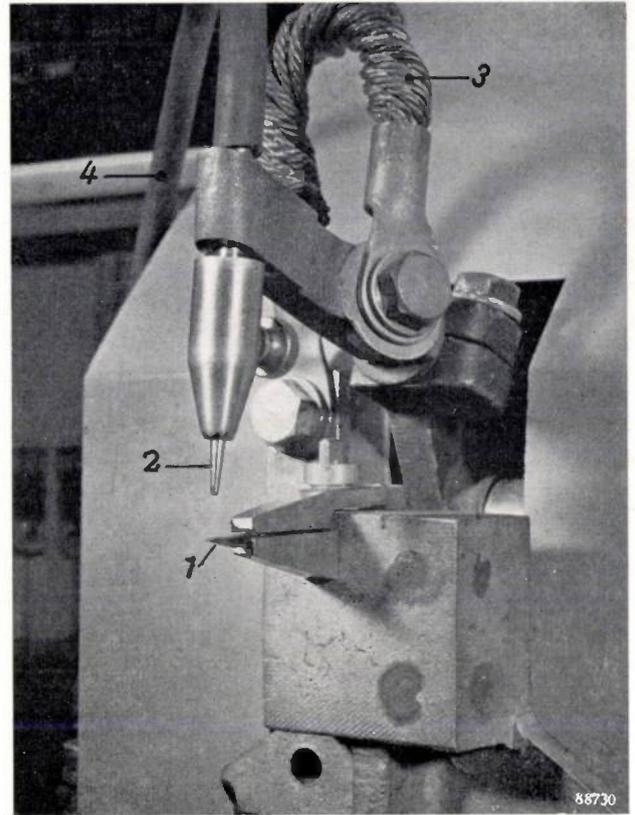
Spot-welder. 1 fixed electrode, 2 moving electrode, 3 current supply cable, 4 hose through which a stream of a reducing mixture of  $H_2$  and  $N_2$  is played on the weld.
